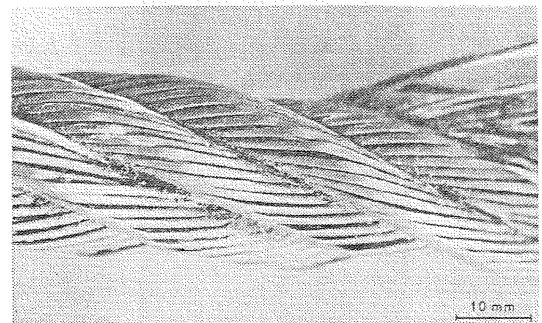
Wearing appearance of outlayers (near the fracture portion)
